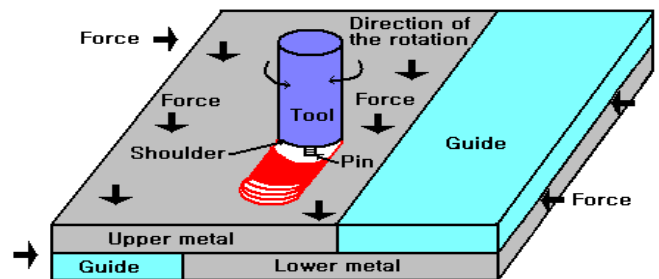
Typical weld tool and process parameters used in the FSW process
